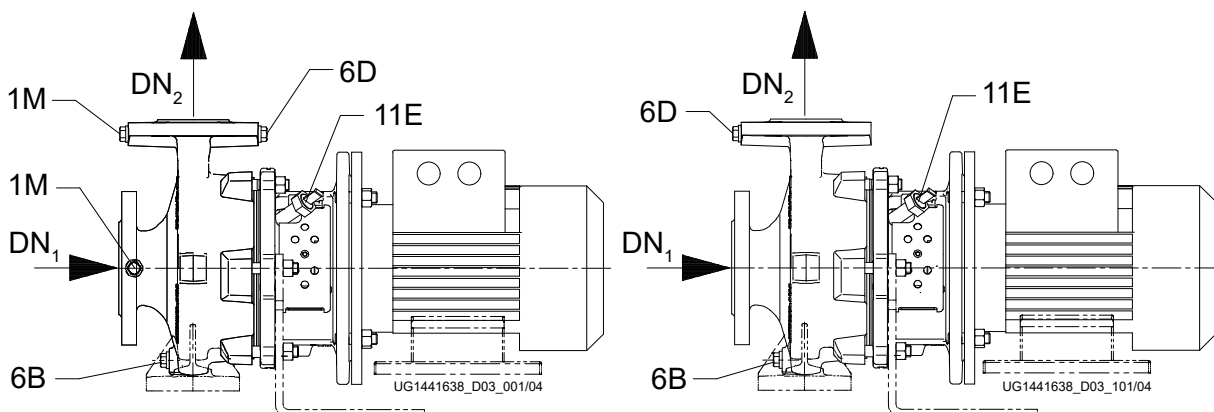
Left: Version with pressure gauge connection; right: Version without pressure gauge connection
